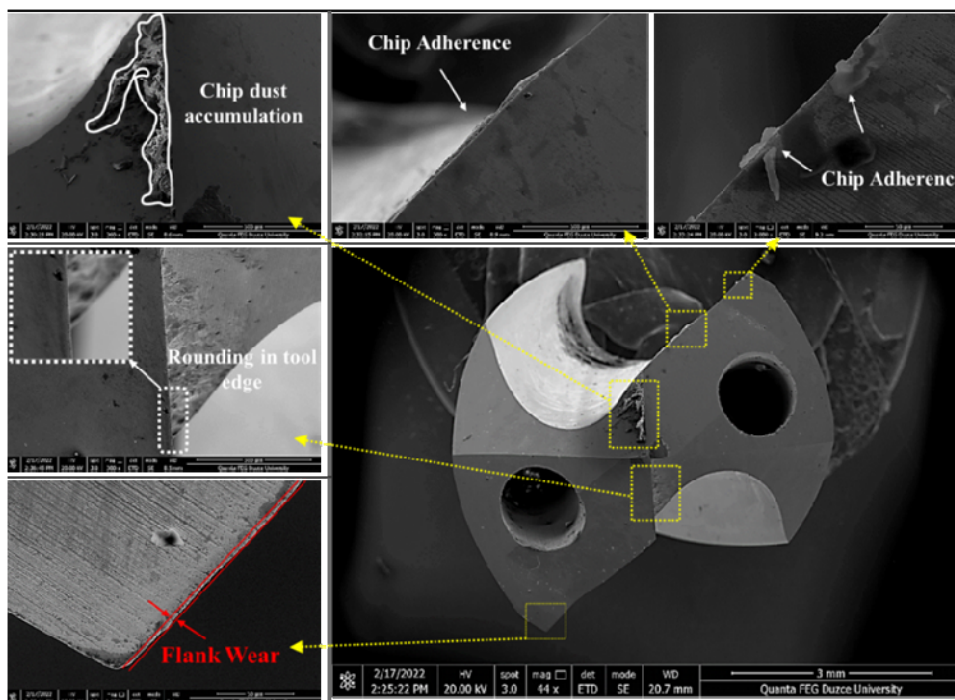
SEM morphology of the wear zones of drill Tool 1 after drilling CARALL composite.
